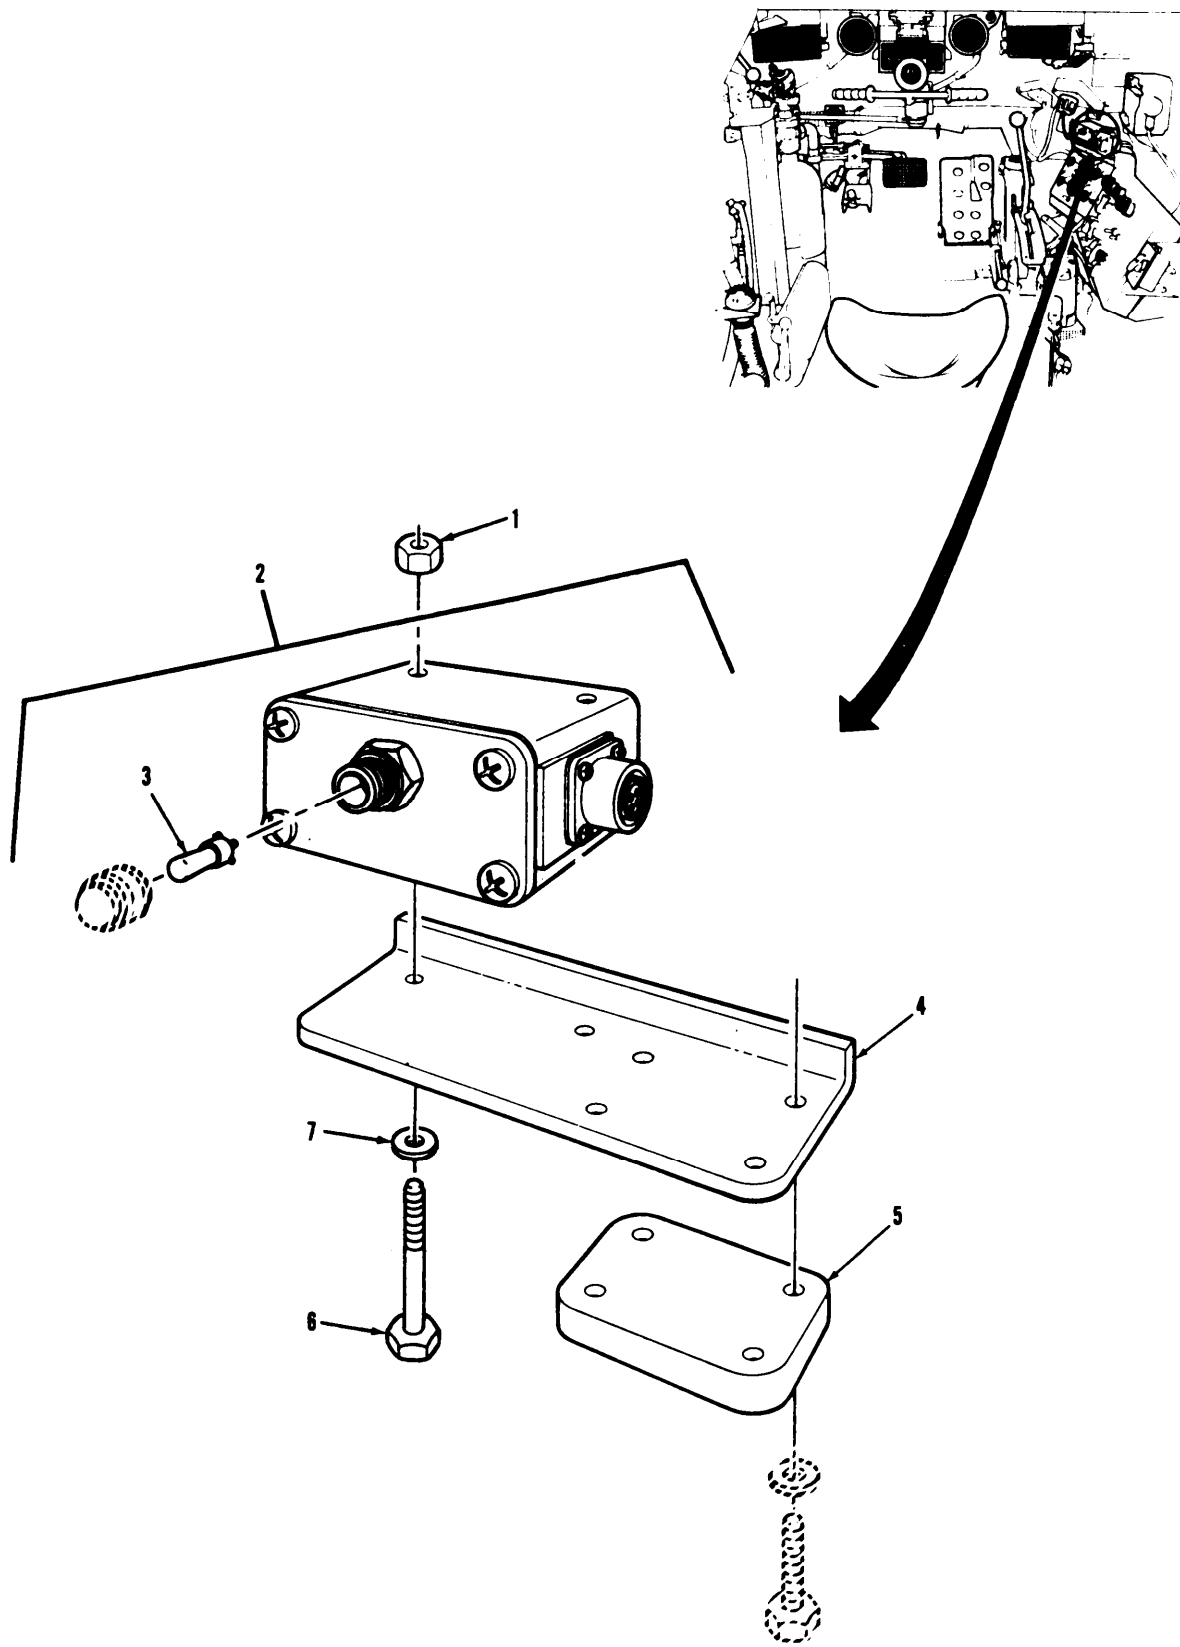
ENGINE AIR CLEANER DUST DETECTOR BOX ASSEMBLY AND RELATED PARTS (M60A3).
